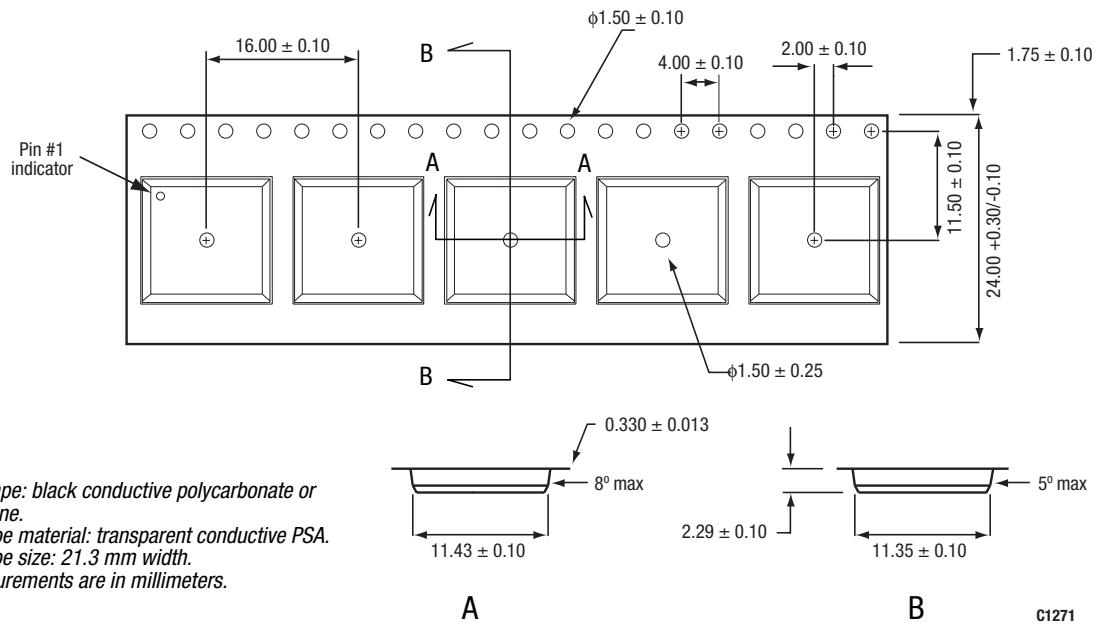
SKY42053 24-Pin PQFP Tape and Reel Dimensions
